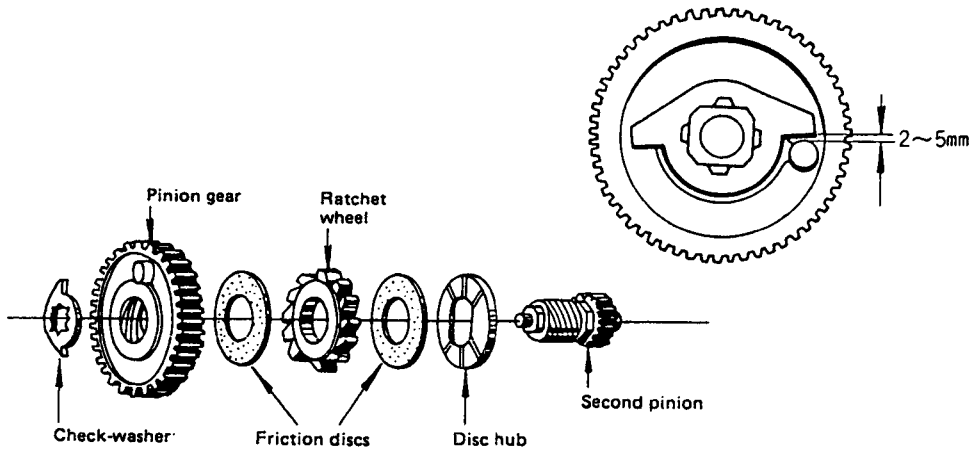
Parts drawing of 2nd shaft (mechanical break assembly)
